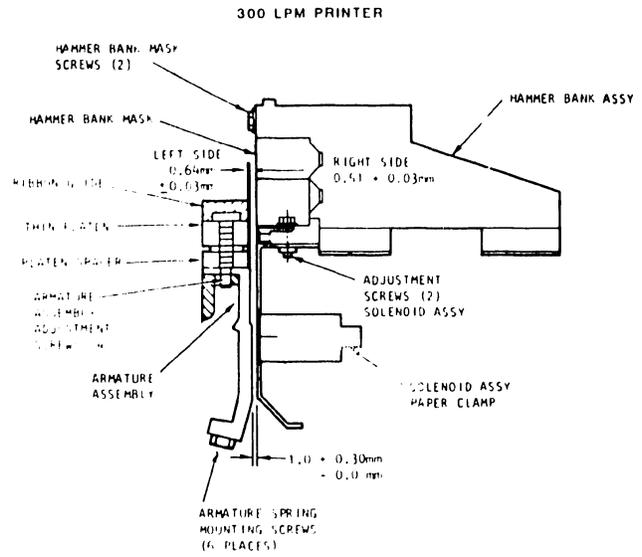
Paper Clamp Armature Assembly Adjustment, Thin Platen
